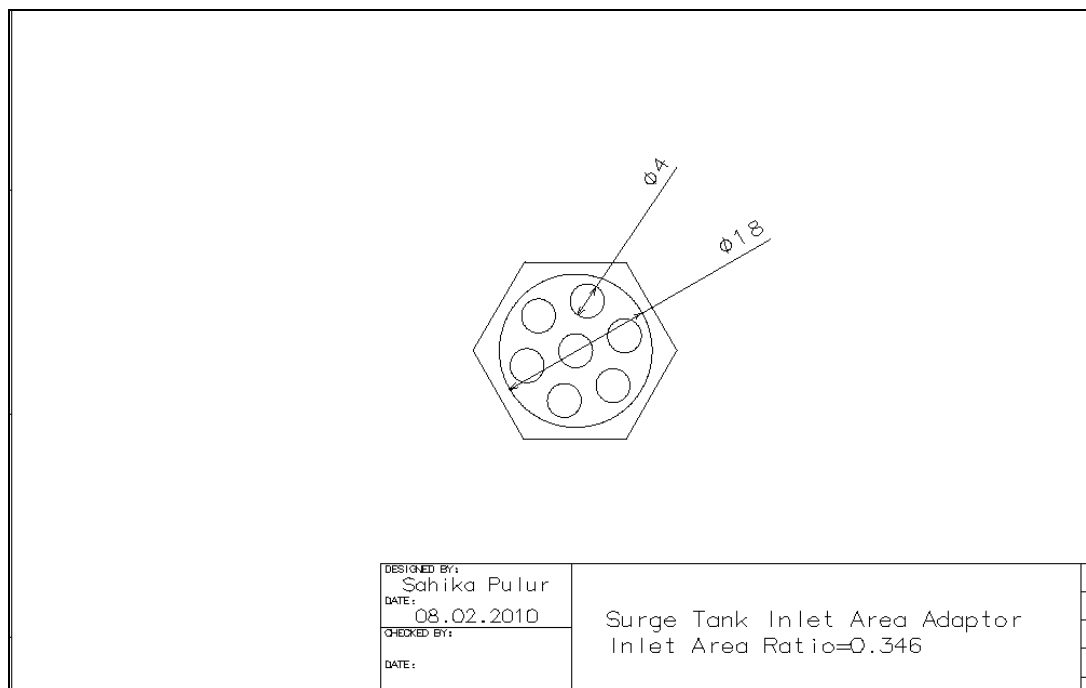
Technical Drawing of Adaptor with $r=0.35$
